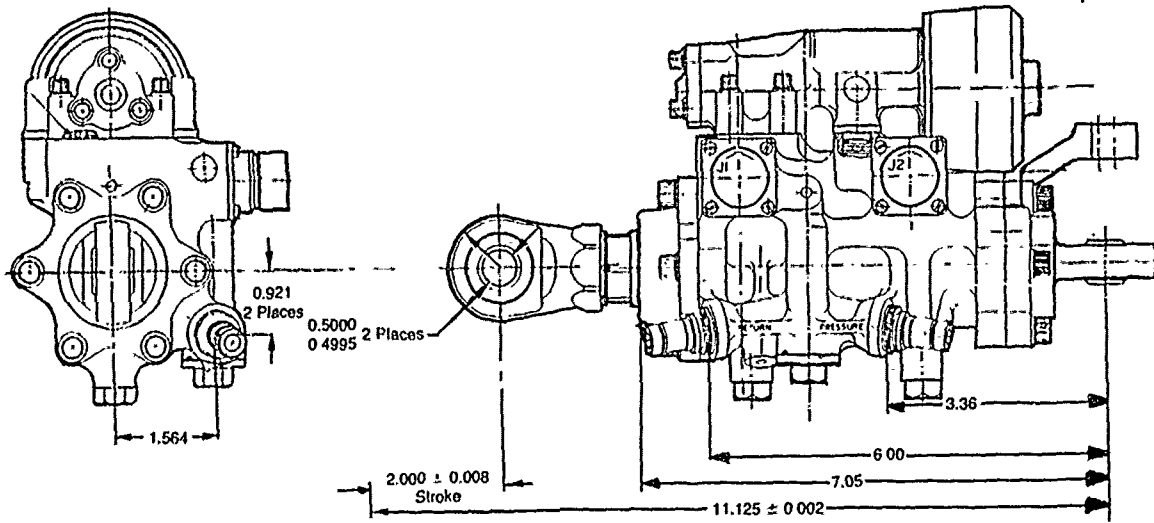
Parker Bertea - Reverser Vane Actuator Outline Drawing
